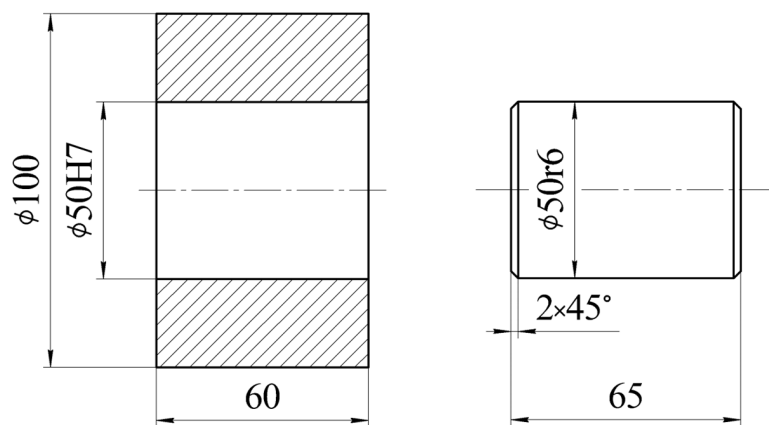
Experimental sample of the bushing and shaft (bore diameter 50 mm)
